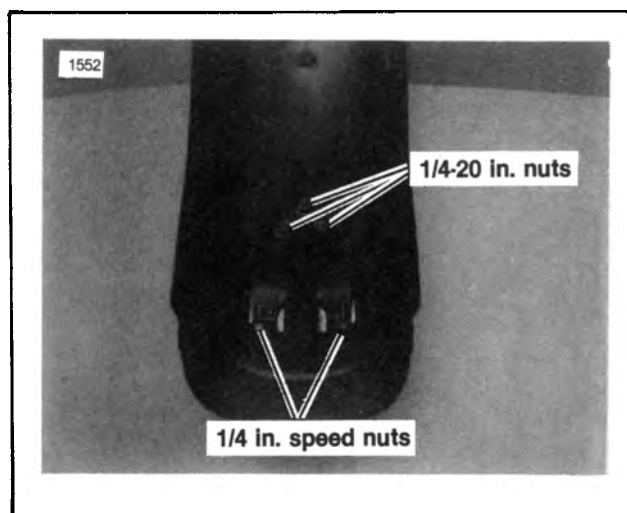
Taillamp and License Plate Bracket Removal — FXR
